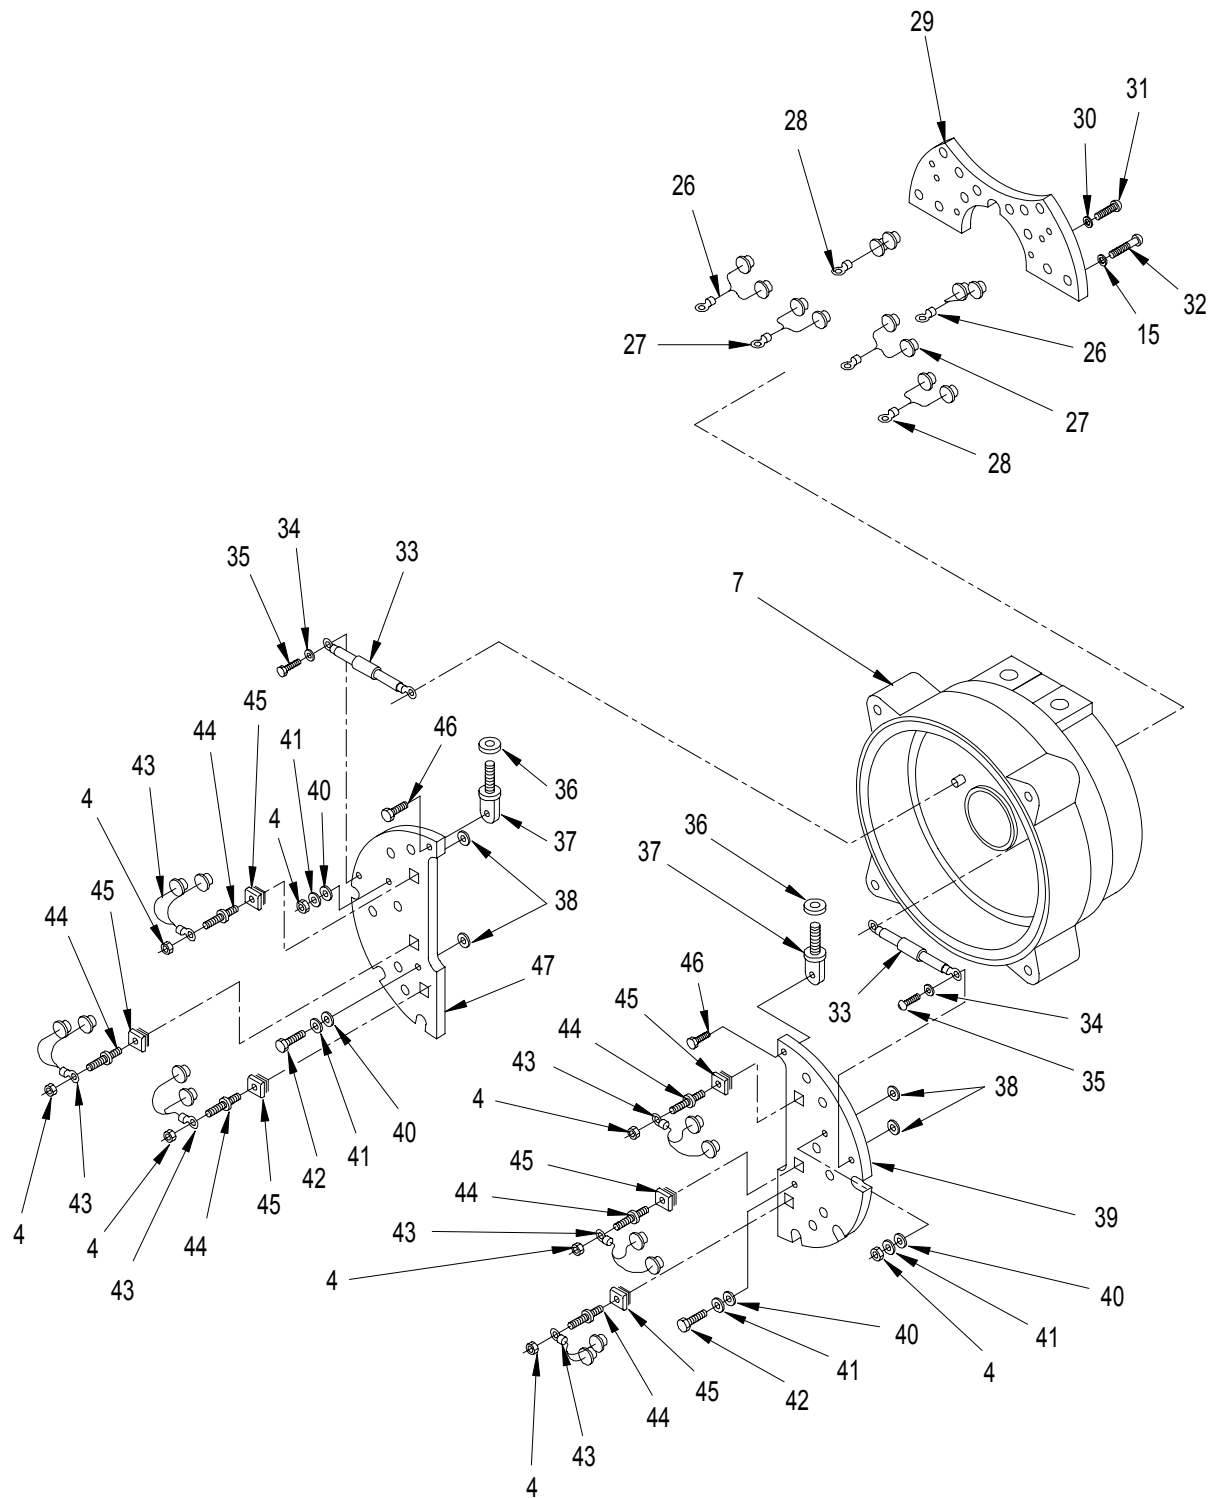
DC Alternator Assembly (MEP-501A) (Sheet 2 of 2)
